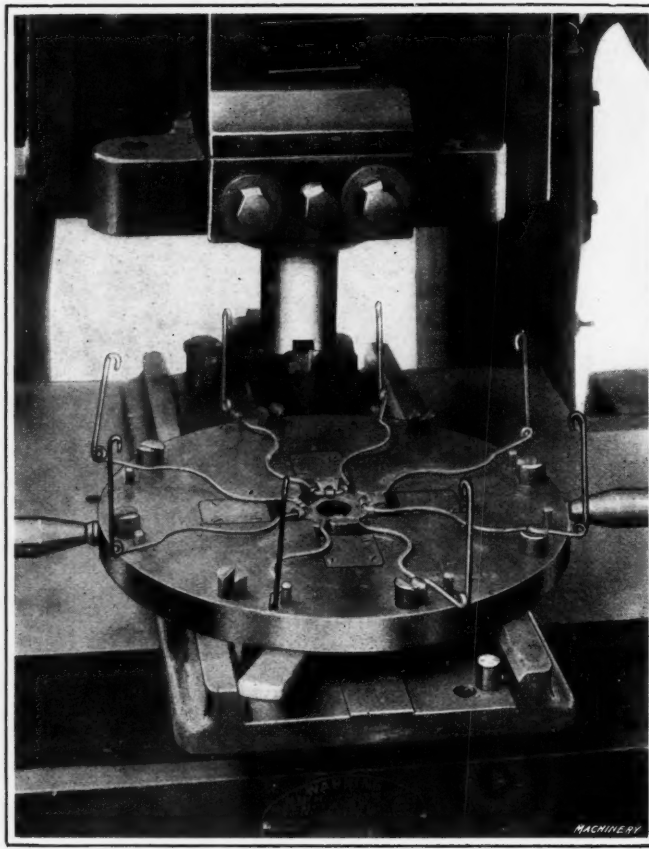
Punch and Die for assembling Wire Arms and Center Plate
